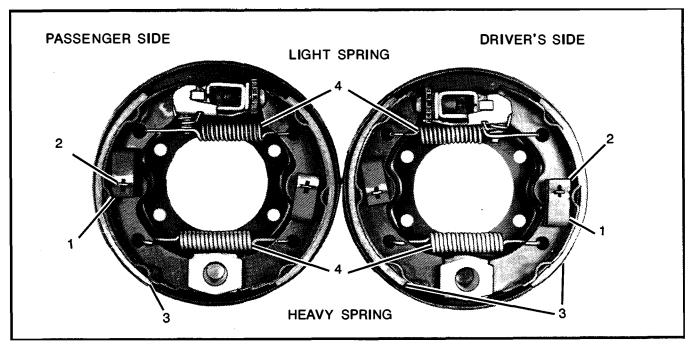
WHEEL BRAKES DRIVER'S AND PASSENGER SIDE
